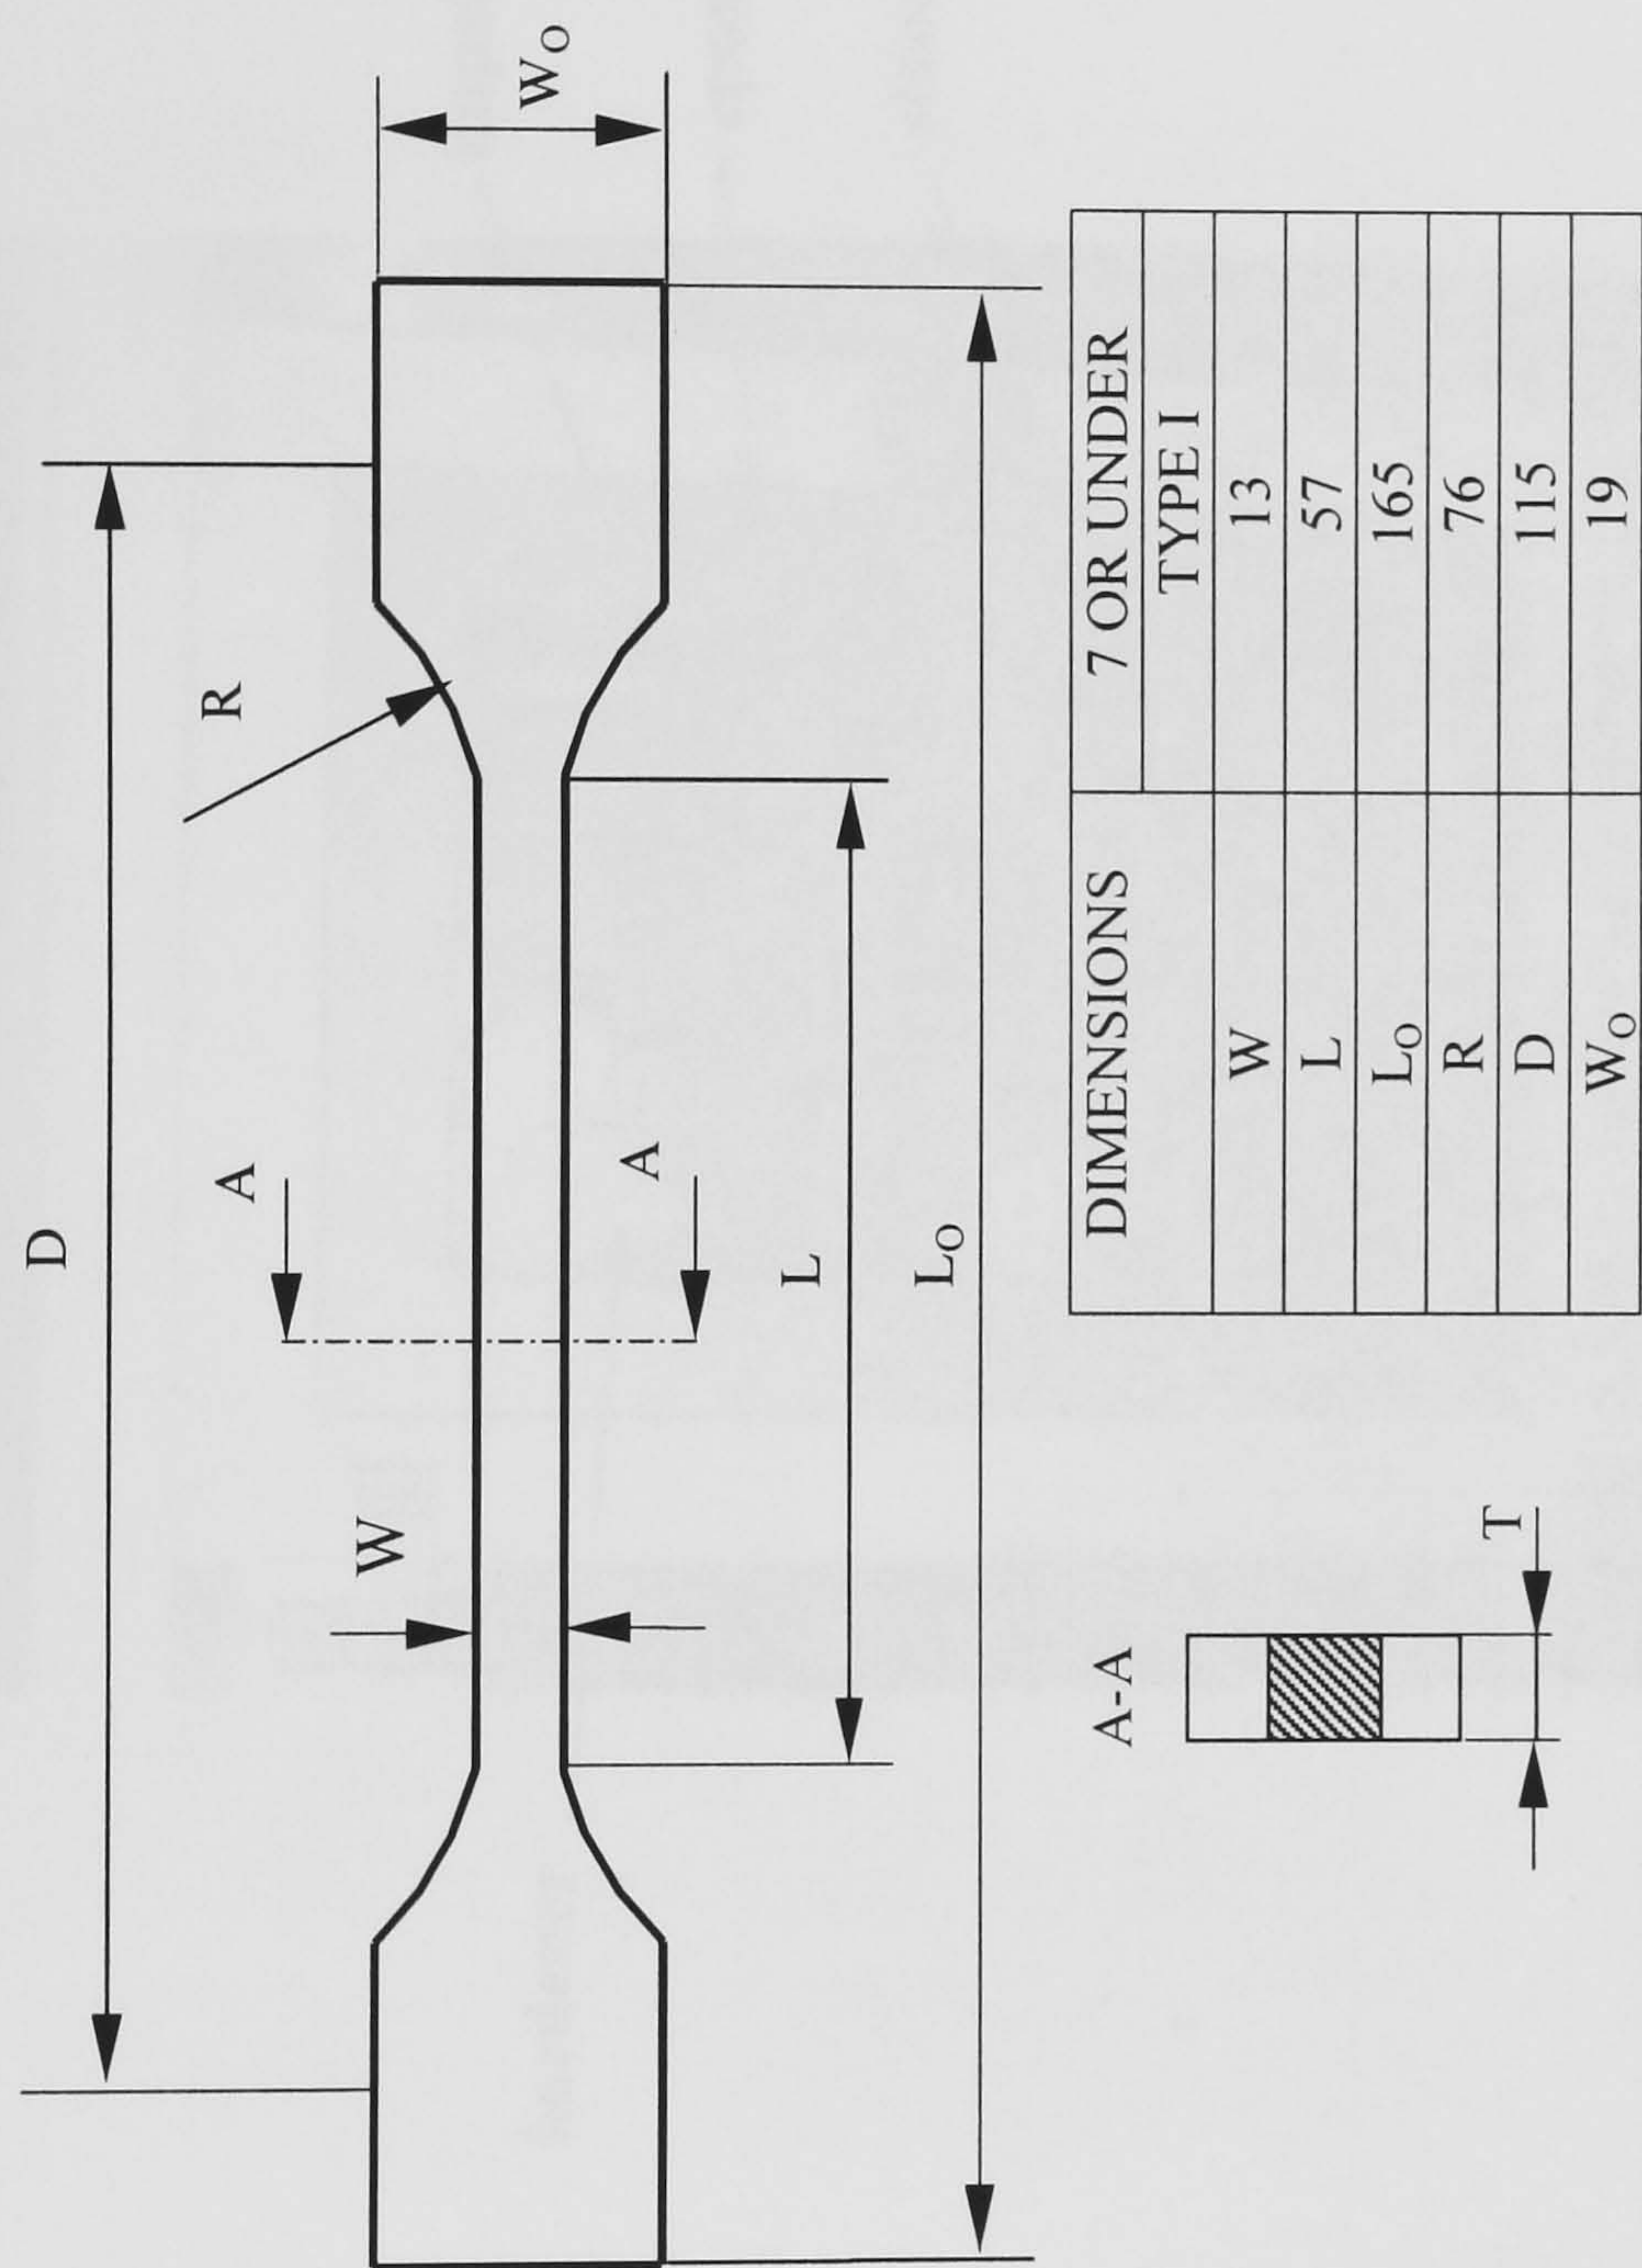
Details of specimen geometry ASTM D 638 Type I
